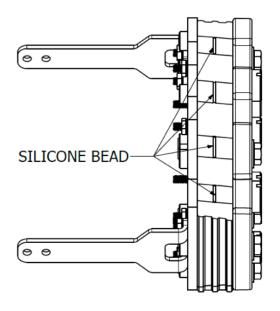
Apply RTV silicone bead to inside radius of cable ports
